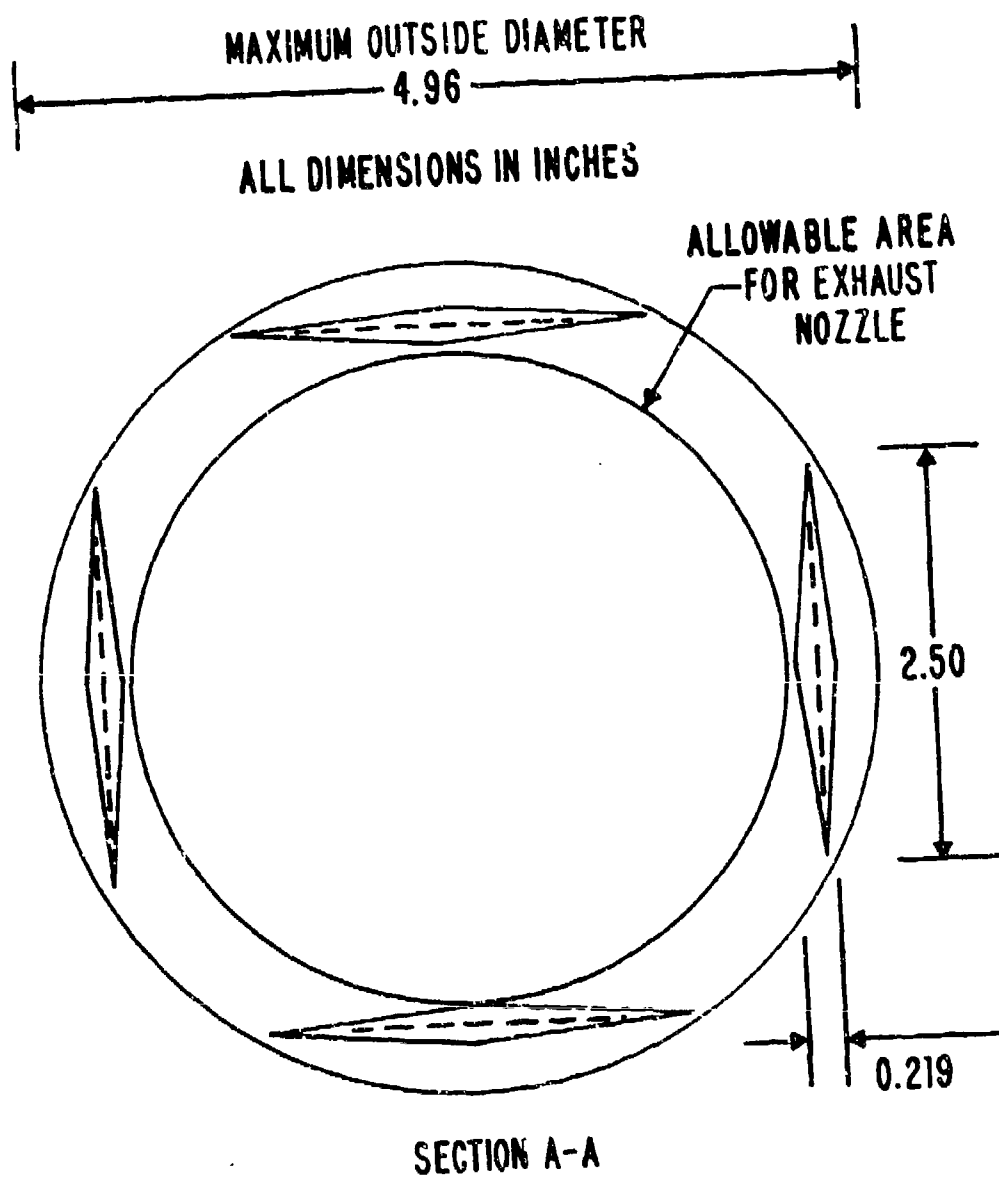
Aft Body Fin Design: Section A-A [24]
